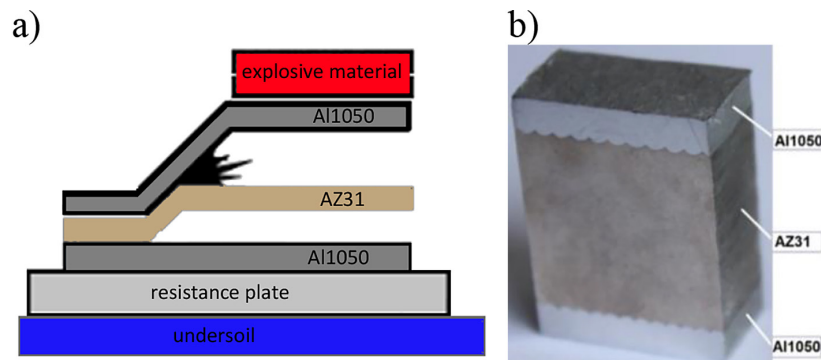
(a) Schematic diagram of the explosion-welding method, (b) sample cut from the finished sheet
